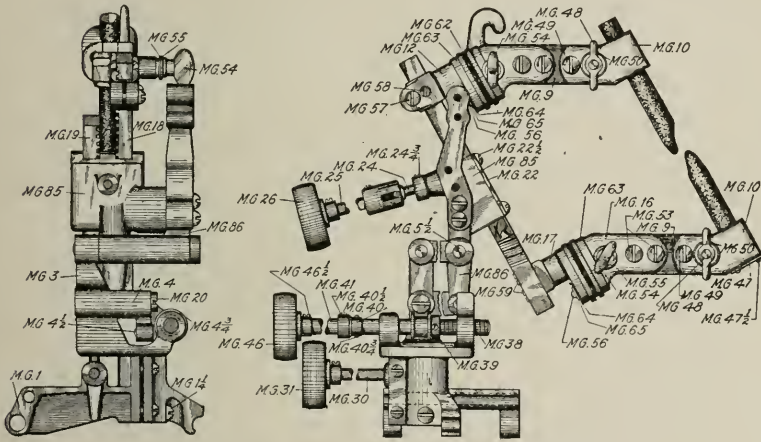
Parts for Motiograph No. 1A Arc Lamp
